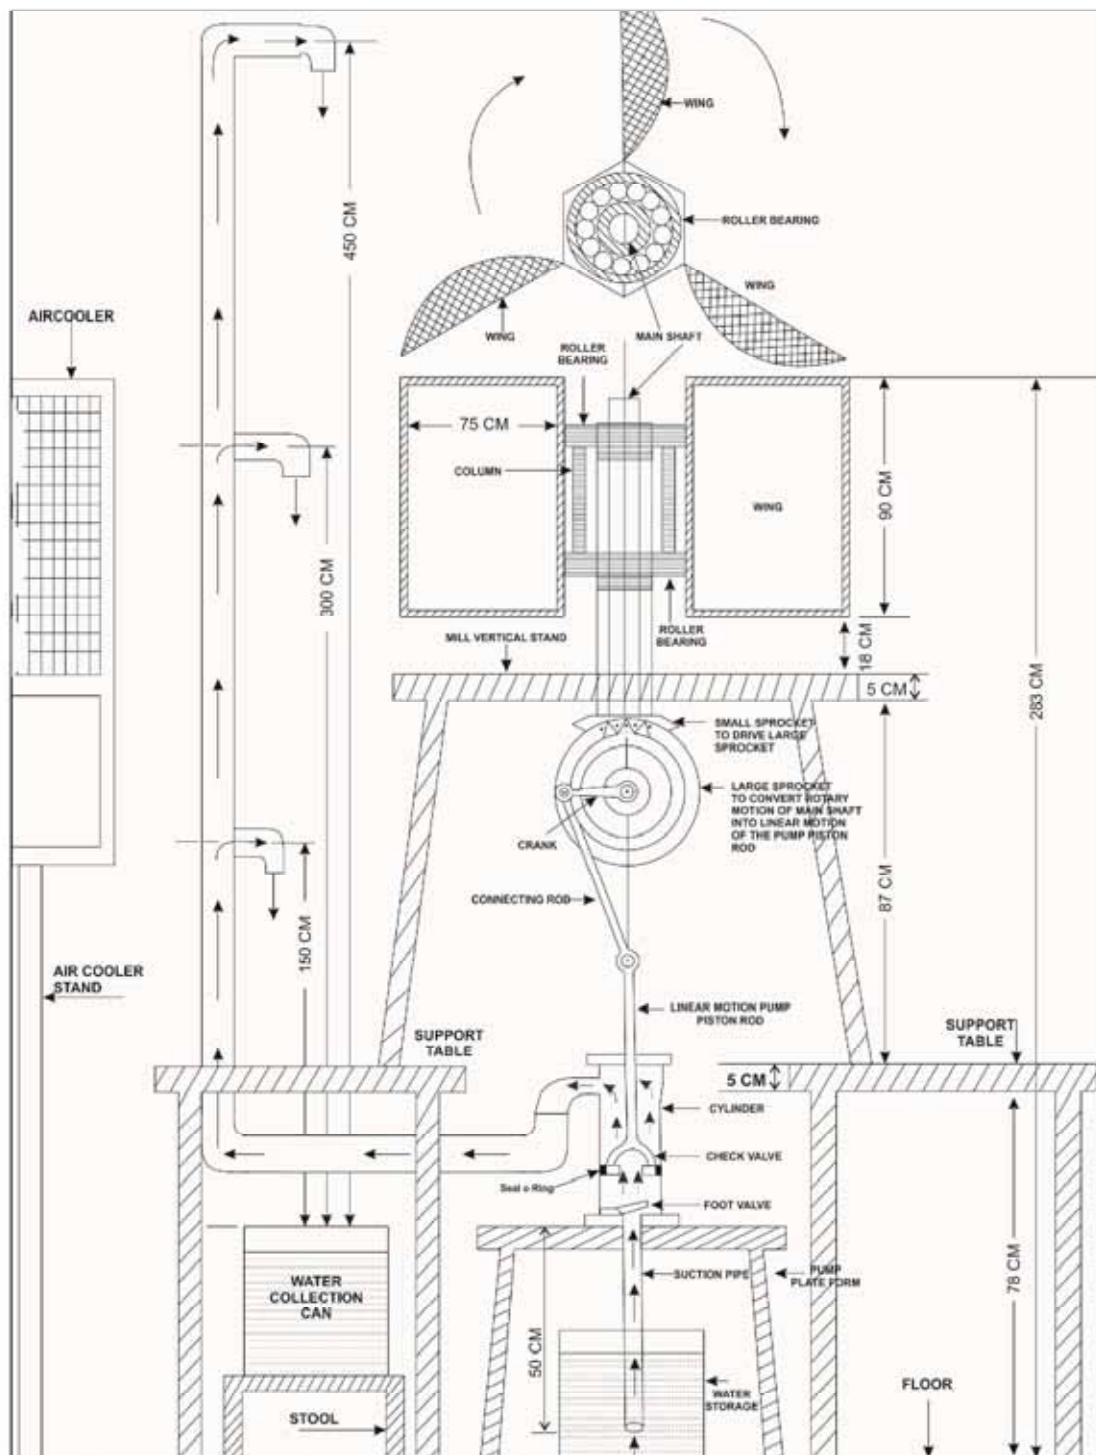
Assembly of final windmill pumping FINAL model for performance test
